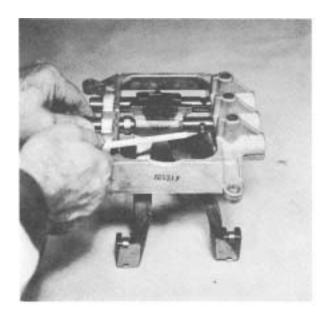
Remove 2nd & 3rd shift rod. CAUTION: Do not lose interlock cross pin or 2nd speed overdrive spacer.
